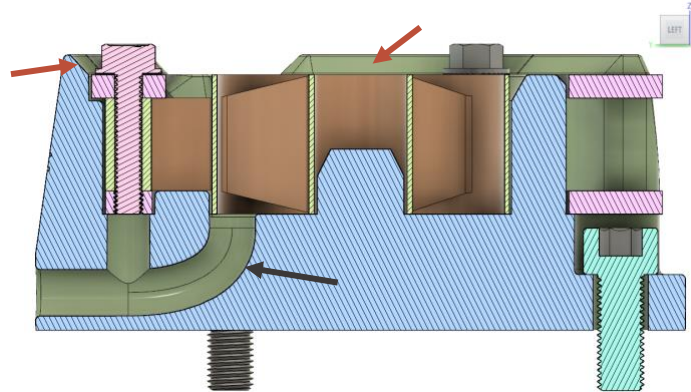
View from above with grey arrows noting 0.6 mm clearance. Red arrows note tapered edge design for ease of assembly.
